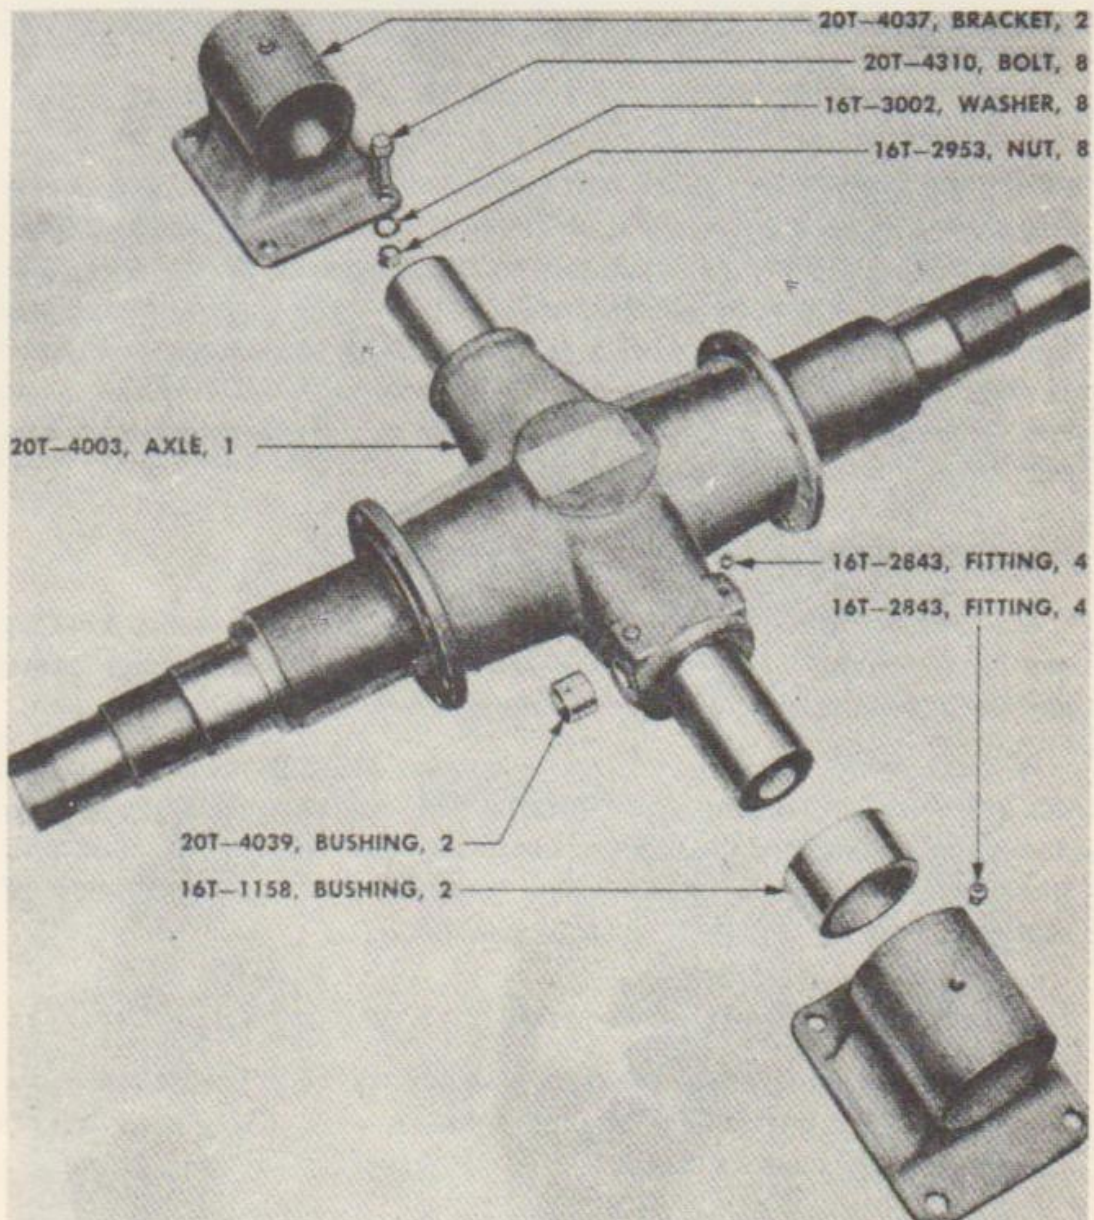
TRUNNION AXLE—EXPLODED VIEW
